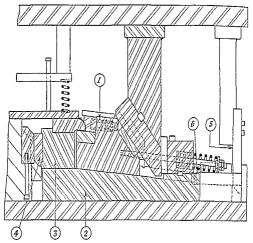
Cam-operated flanging die for workpiece shown in Fig. 12-13.
